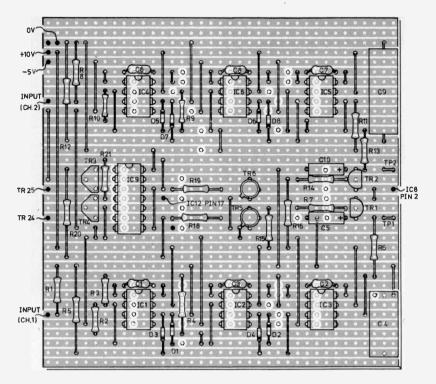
The component layout, Veroboard cutting details and board interwiring for the PPM
